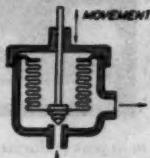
Packless Construction—Illustrating packless valve construction. Same principle used to seal stem movement or adjustment in many types of apparatus.
